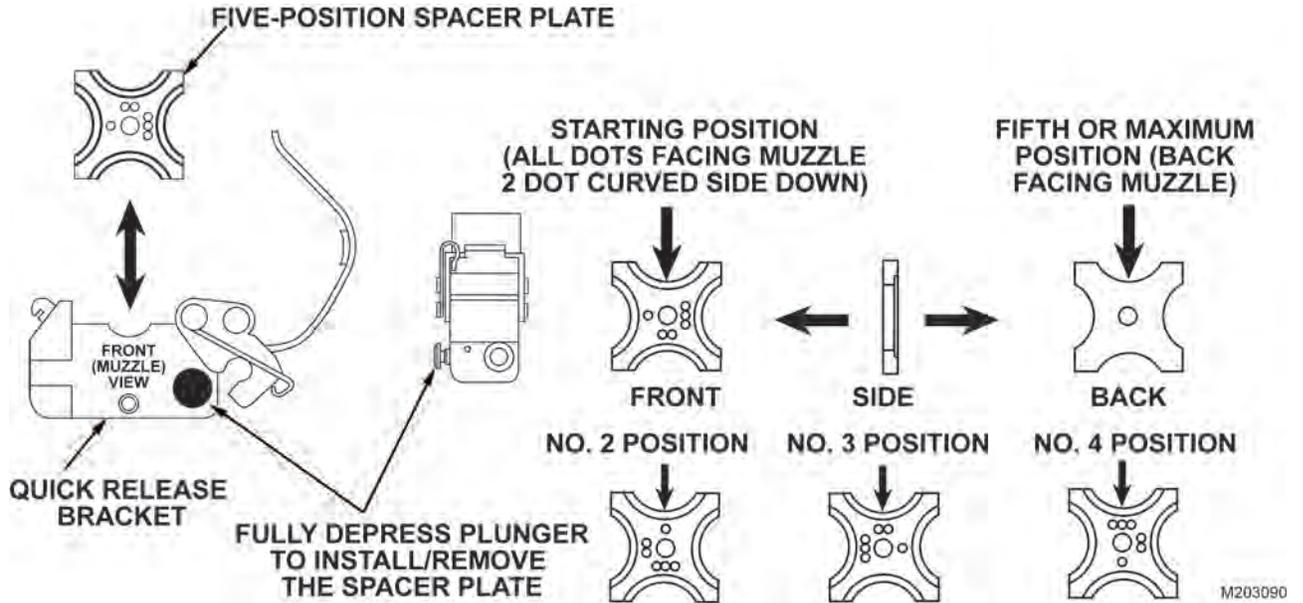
Quick Release Bracket Assembly — M4 Carbine.
